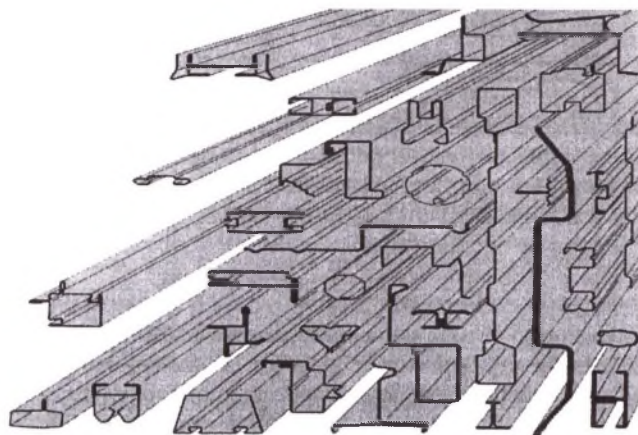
Standard roll formed shapes of the open cross – section [1]
